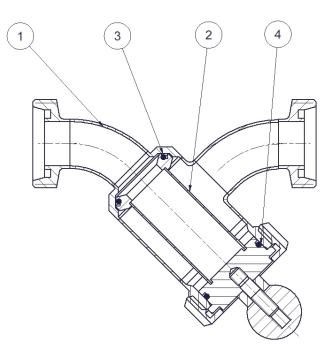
Sectional view dirt collecting filter DIN m/m DN25-DN32
